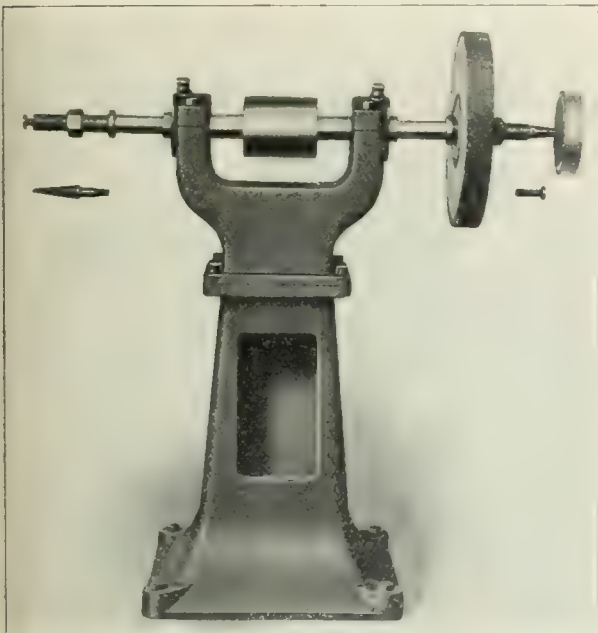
A Special Design of Buffing and Polishing Machine Built by the Autogenous Welding Company, Worcester, Mass.
